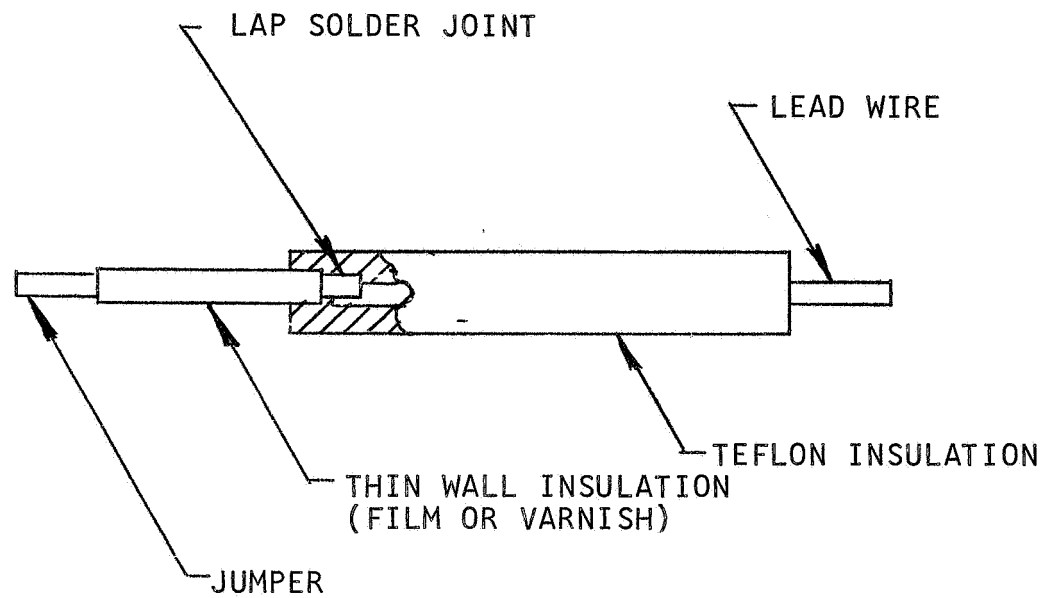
LEAD-TO-LEAD CONNECTION LAP SOLDER JOINT
